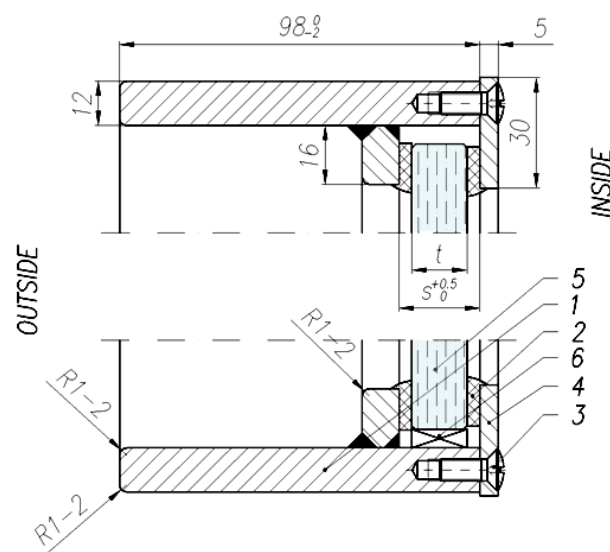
Window ship cross section: 1 - window frame, 2 - rubber seal, 3 - screw cap, 4 - windows fixing package overlay, 5 - windows pack, 6 - spacing insert
